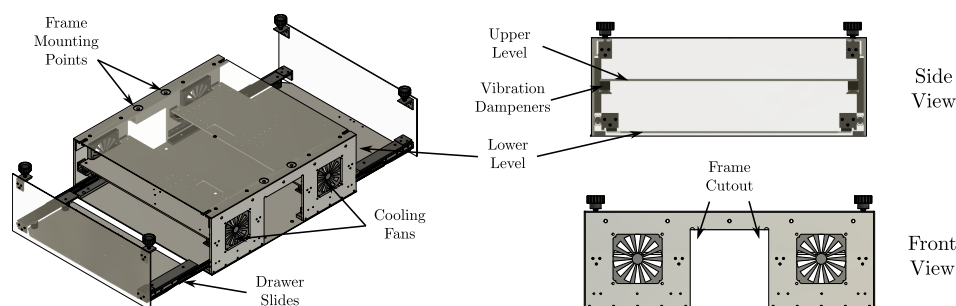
Chassis body design - incorporating a sliding lower tray and fixed upper tray with cooling fans mounted at the body's front and rear.
